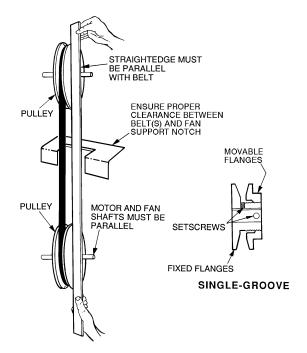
Evaporator-Fan Alignment and Adjustment
